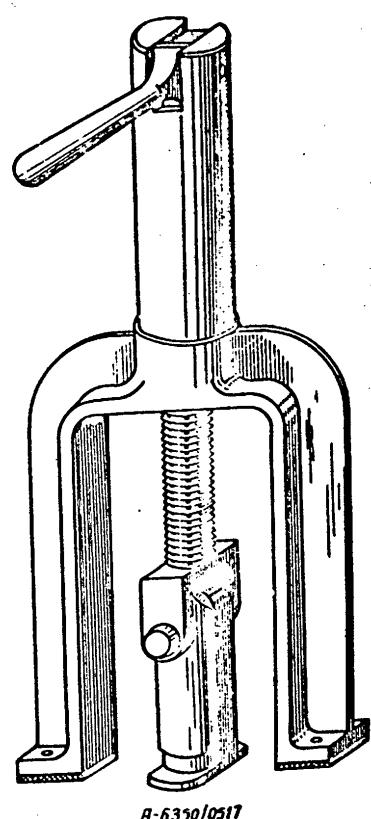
REMOVER FOR CRANKPIN PLUGS
